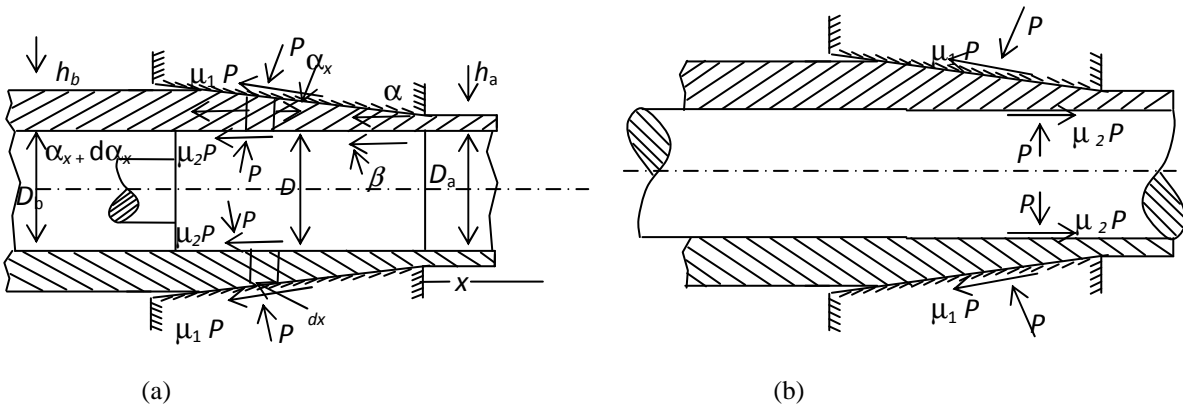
A schematic diagram of the tube drawing process (a) with slightly tapered plug (b) with a moving mandrel
